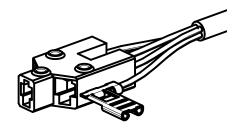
Compressor motor cable and earth for FMF compressor series
